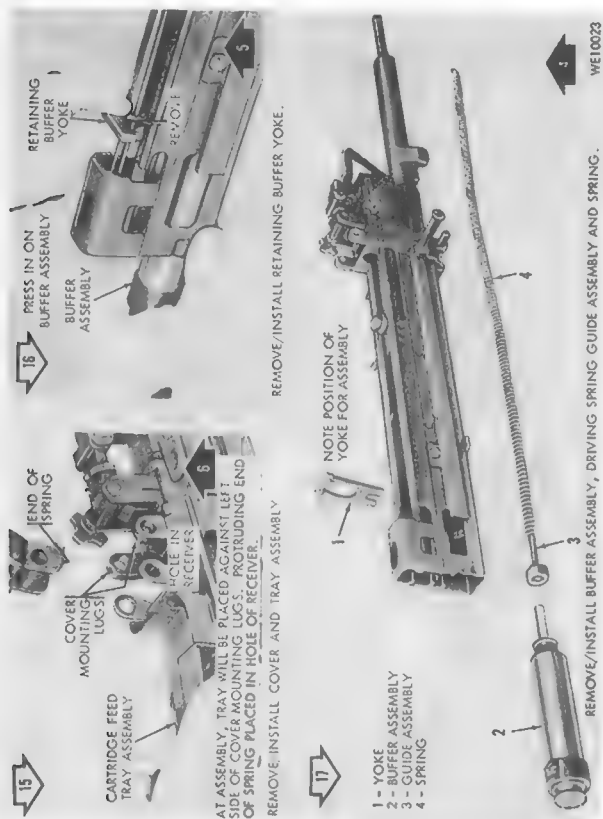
Disassembly/assembly of machine gun (sheet 5 of 7).
